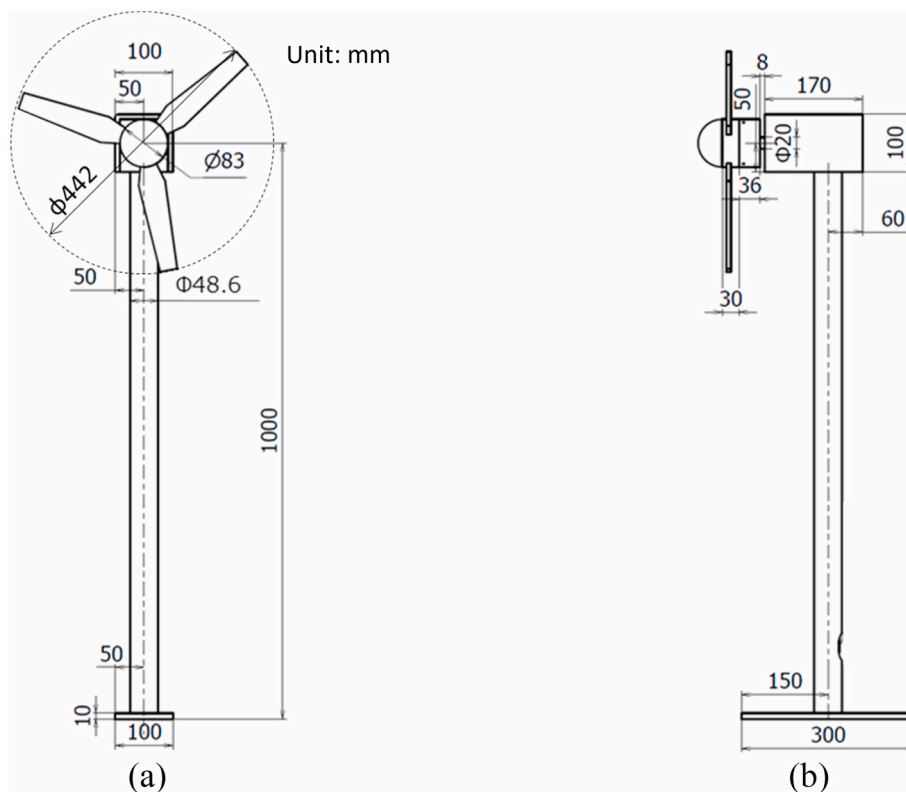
Details of the wind turbine model: (a) front view, (b) side view.
